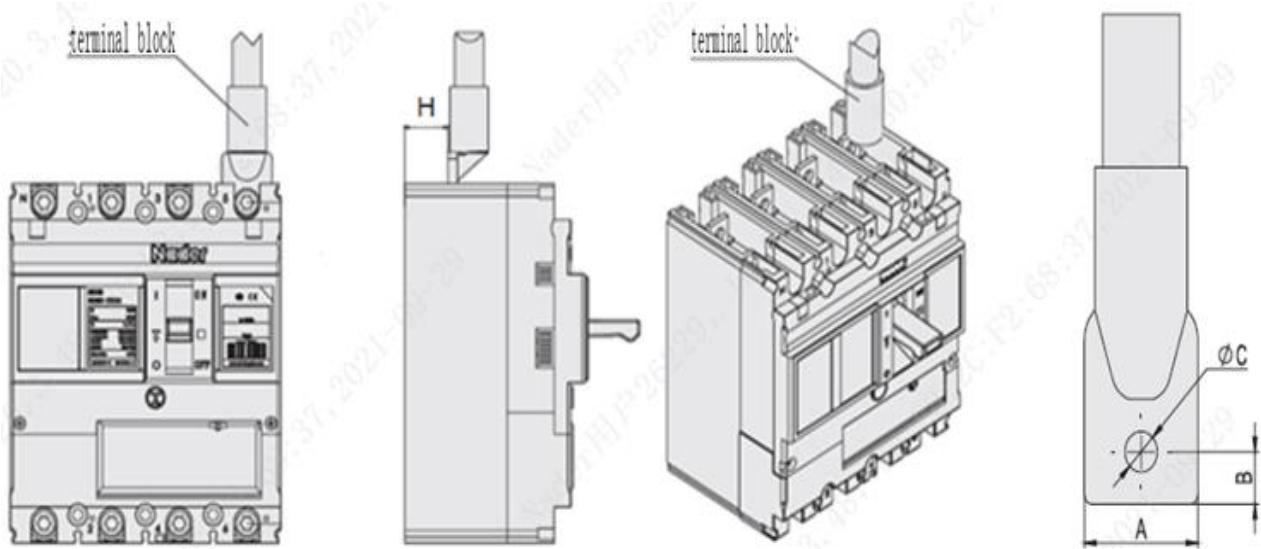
Connection diagram of copper bar in front of board or copper cable with wiring terminal
